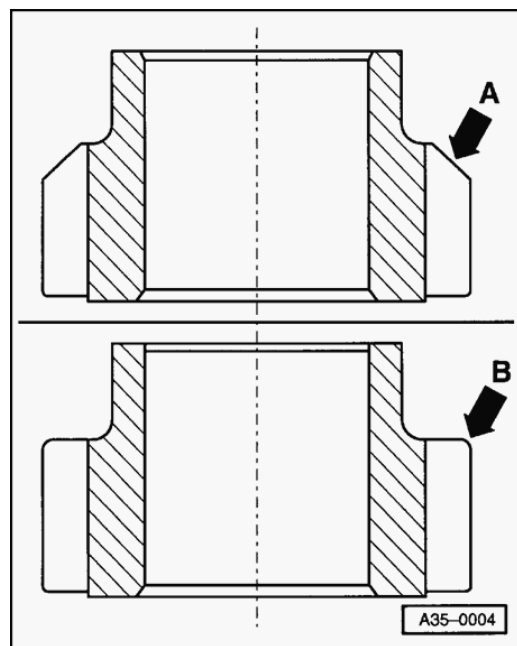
Allocation of operating sleeve for 5th and reverse gears
